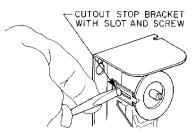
The convertible adjustment controls have a screw type cutout stop. The stop screw must be loosened and moved to the stop setting desired. Tighten screw after setting is made.
